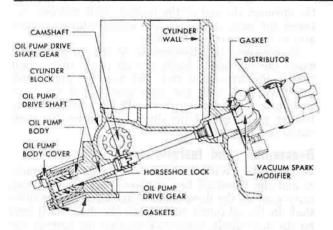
CONSTRUCTION OF THE CHAMPION OIL PUMP AND DISTRIBUTOR ASSEMBLY
